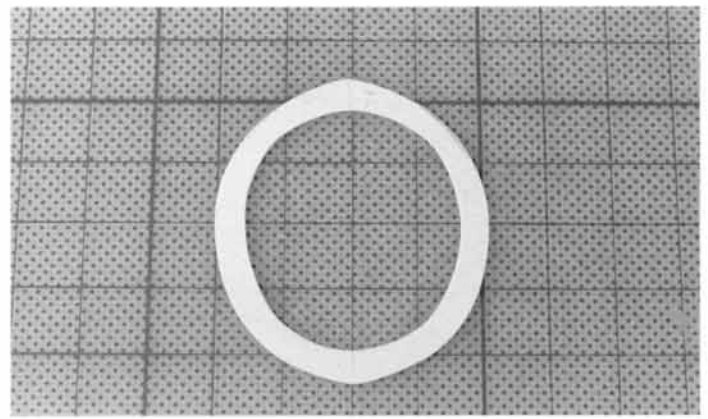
This interior frame is now ready to be installed inside the fuselage.
